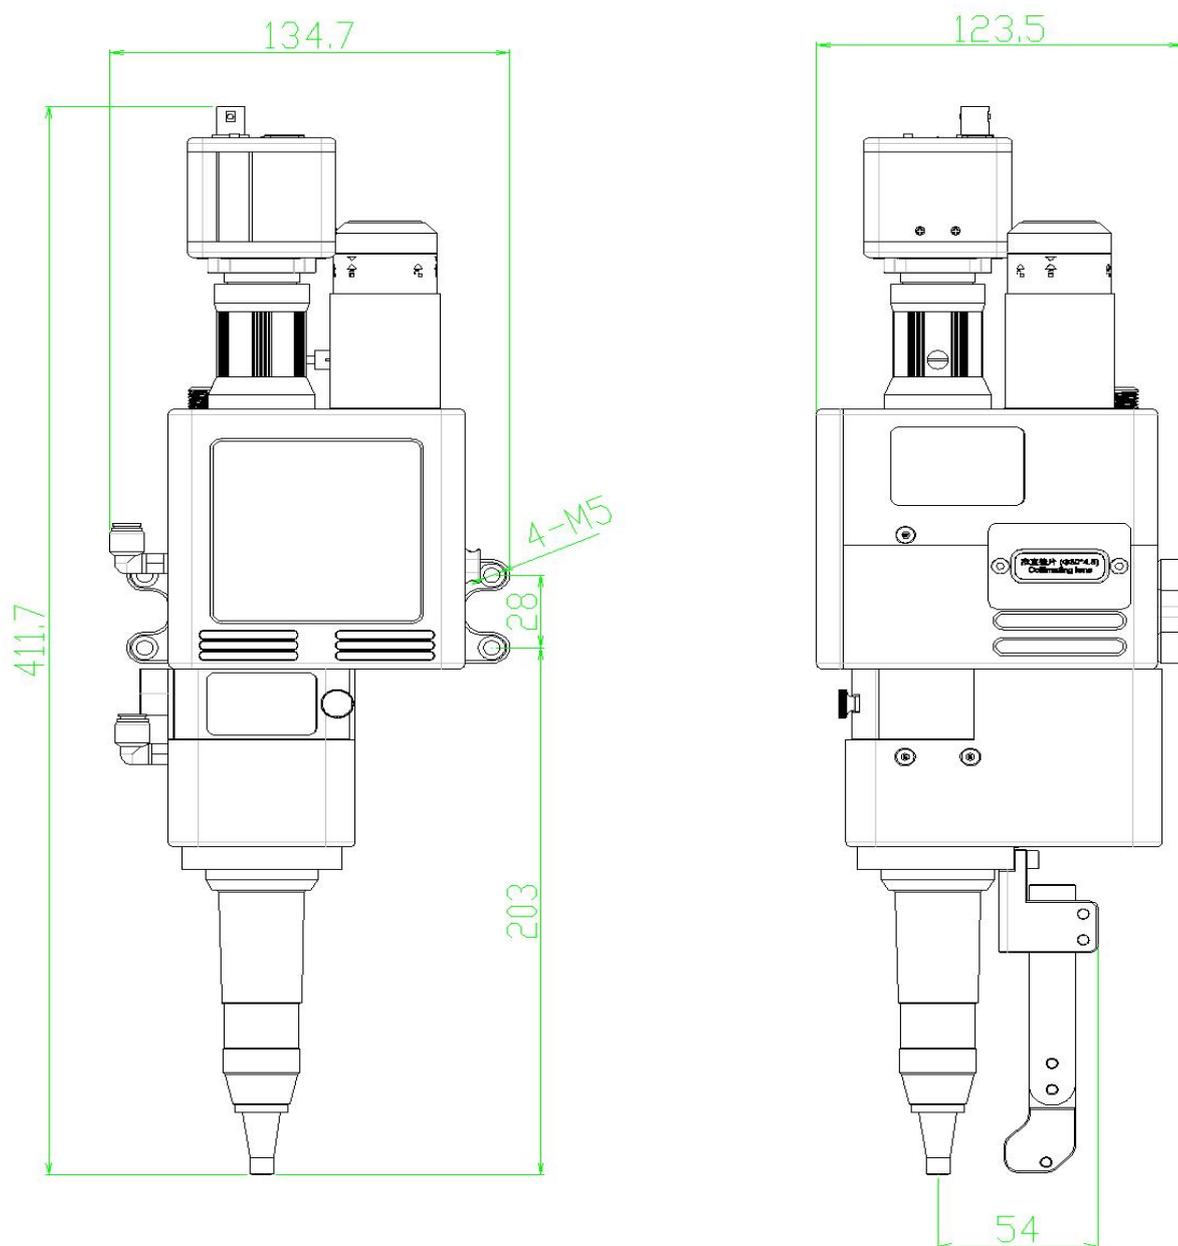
Dimensional Drawing - Rotary Wire Feed
